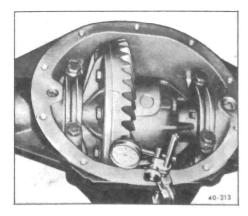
Checking Ring Gear to Pinion Backlash
